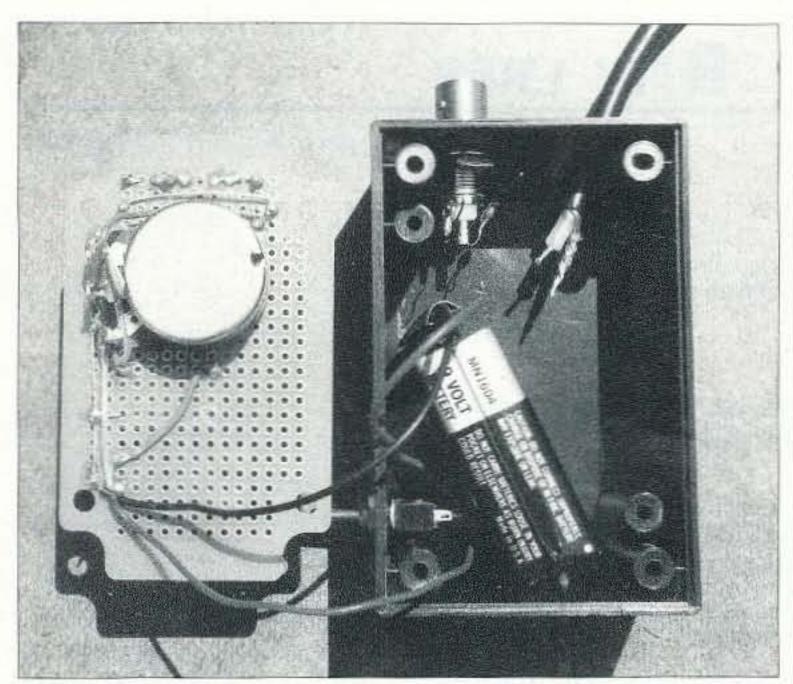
Photo B. Interior of the attenuator showing a rear view of the circuit board before final assembly.
